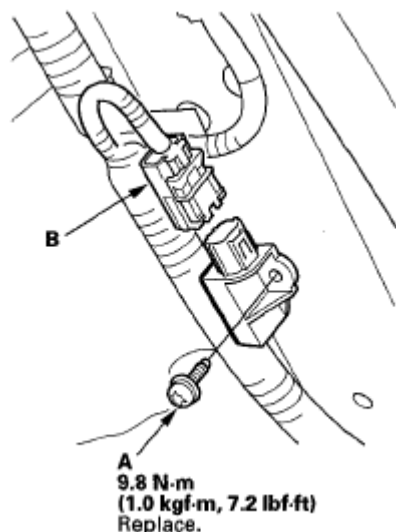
Identifying Floor Wire Harness 2P Connector With Torque Specification
